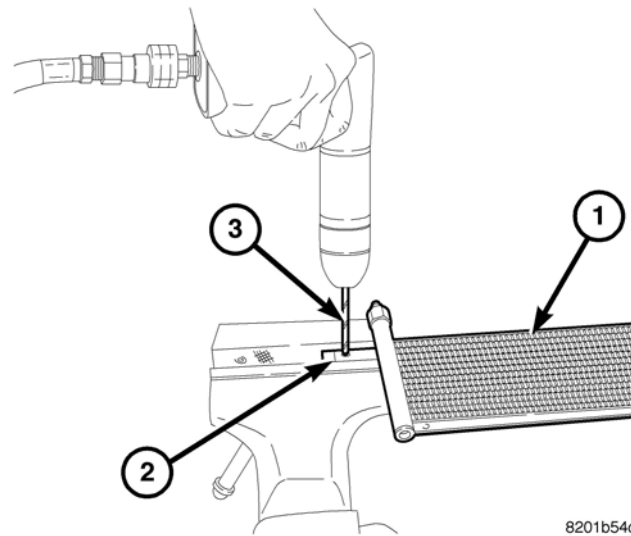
DRILL HOLE IN LEFT COOLER BRACKET
